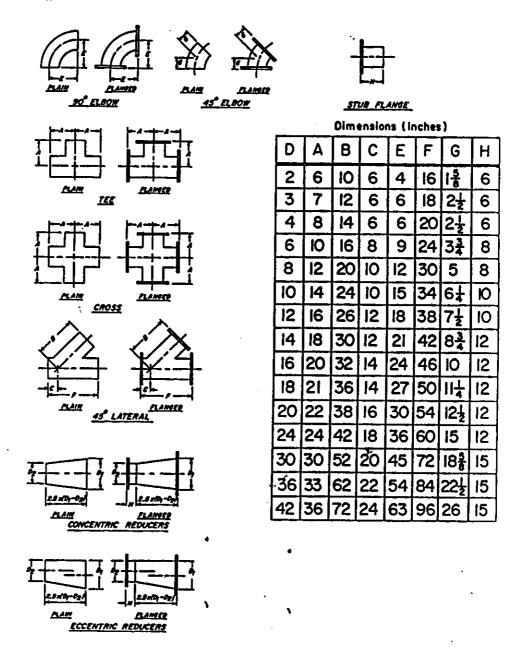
Dimensions of reinforced-polyester pipe fittings.
